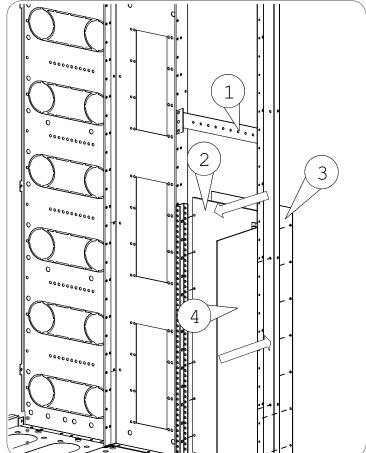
Installing flash barrier parts to E-serie cell centres.
